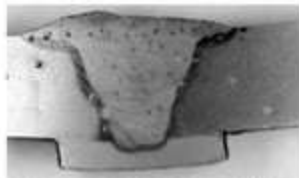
Cross-section of a well showing low adhesion and a dark band adjacent to the wall (Courtesy of R. B. Peck, Jr.)
